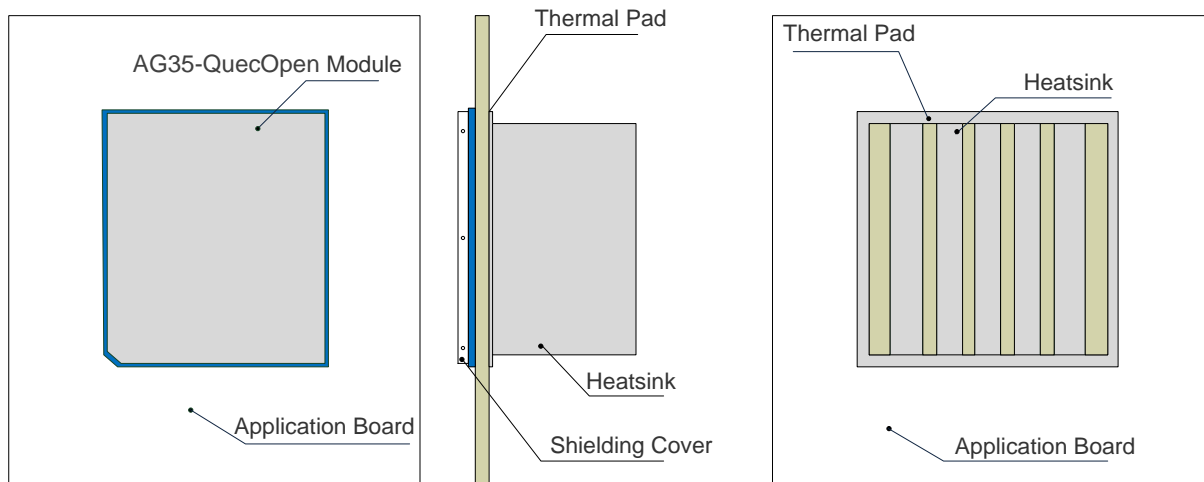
Referenced Heatsink Design (Heatsink at the Backside of Customers' PCB)
